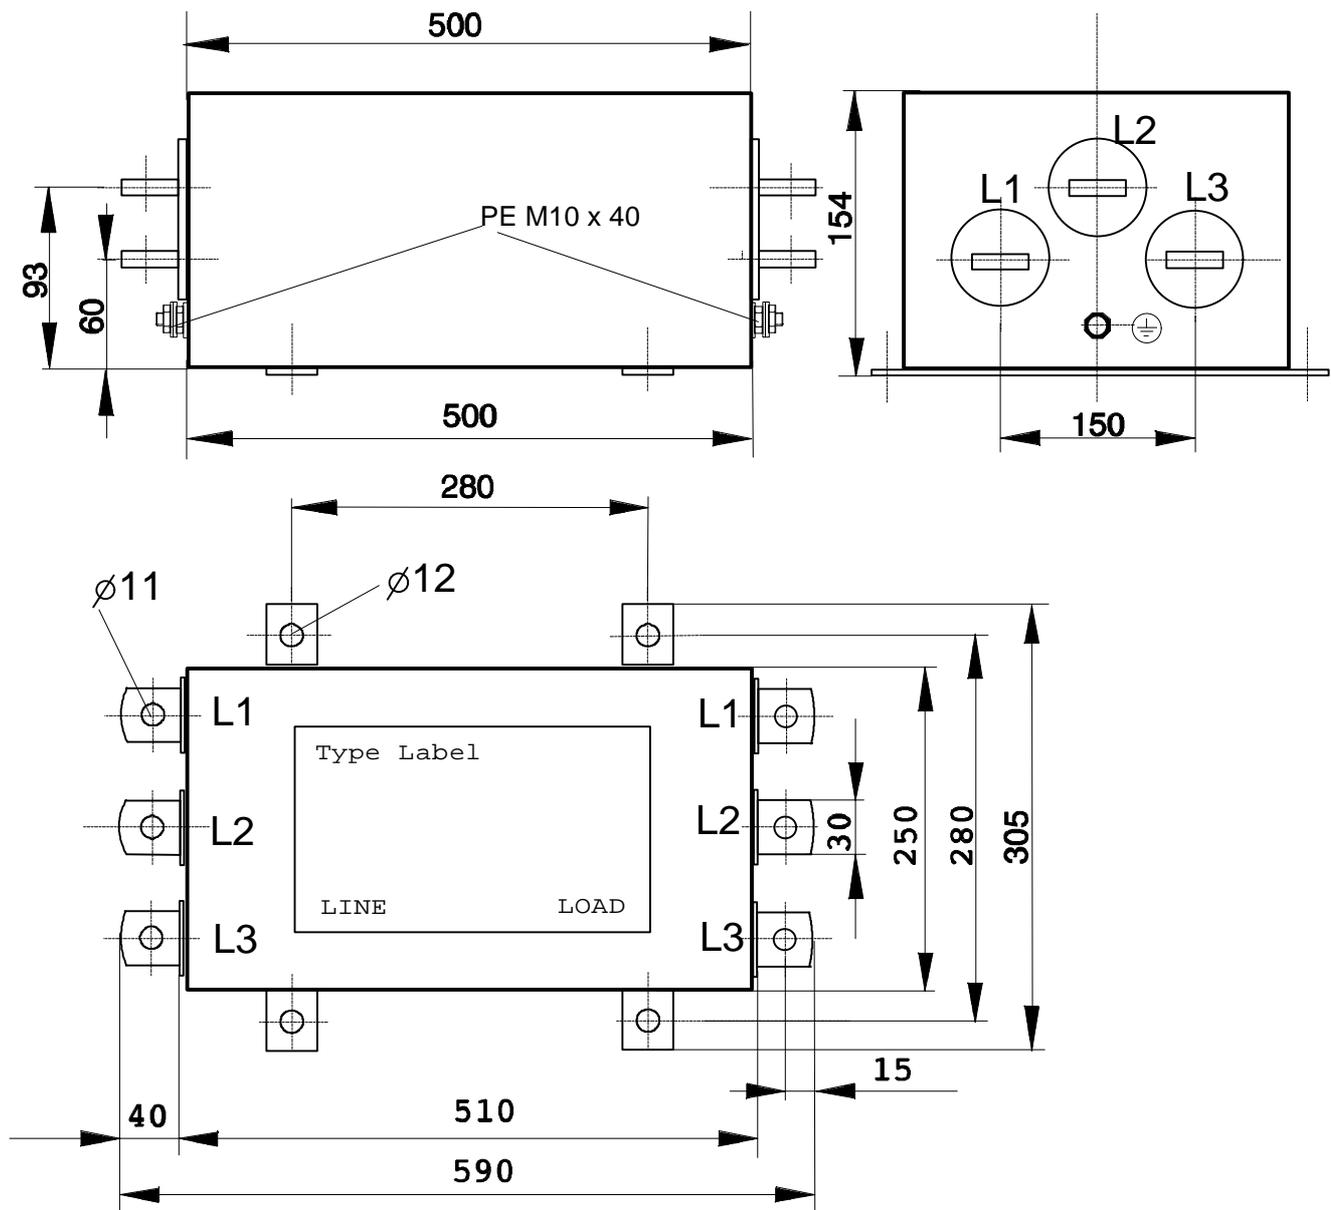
Dimension Drawing EMC filter, sizes G to H
